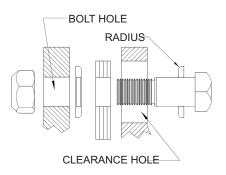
Bolt, Washers, Locknuts and Disc pack assembly
